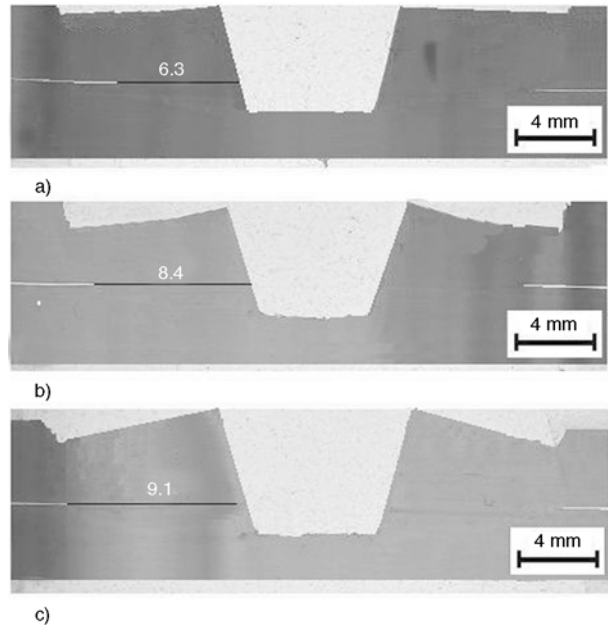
The effect of the shoulder angle on the joint cross section, (a) 1.5° shoulder angle tool, (b) 6° shoulder angle tool and (c) 12° shoulder angle tool
